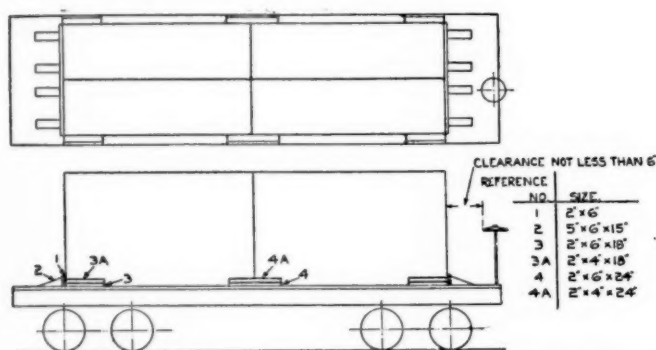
R—Boxed Automobiles—Side and End Blocking. Two Boxes to Width of Car
